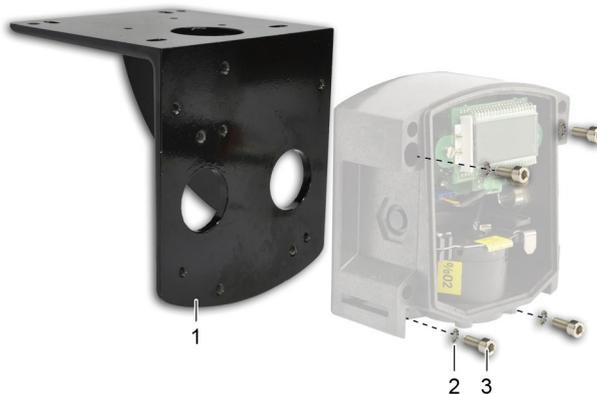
ceiling mounting with a brace. The fixing drawing is identical to this of the wall mount.
